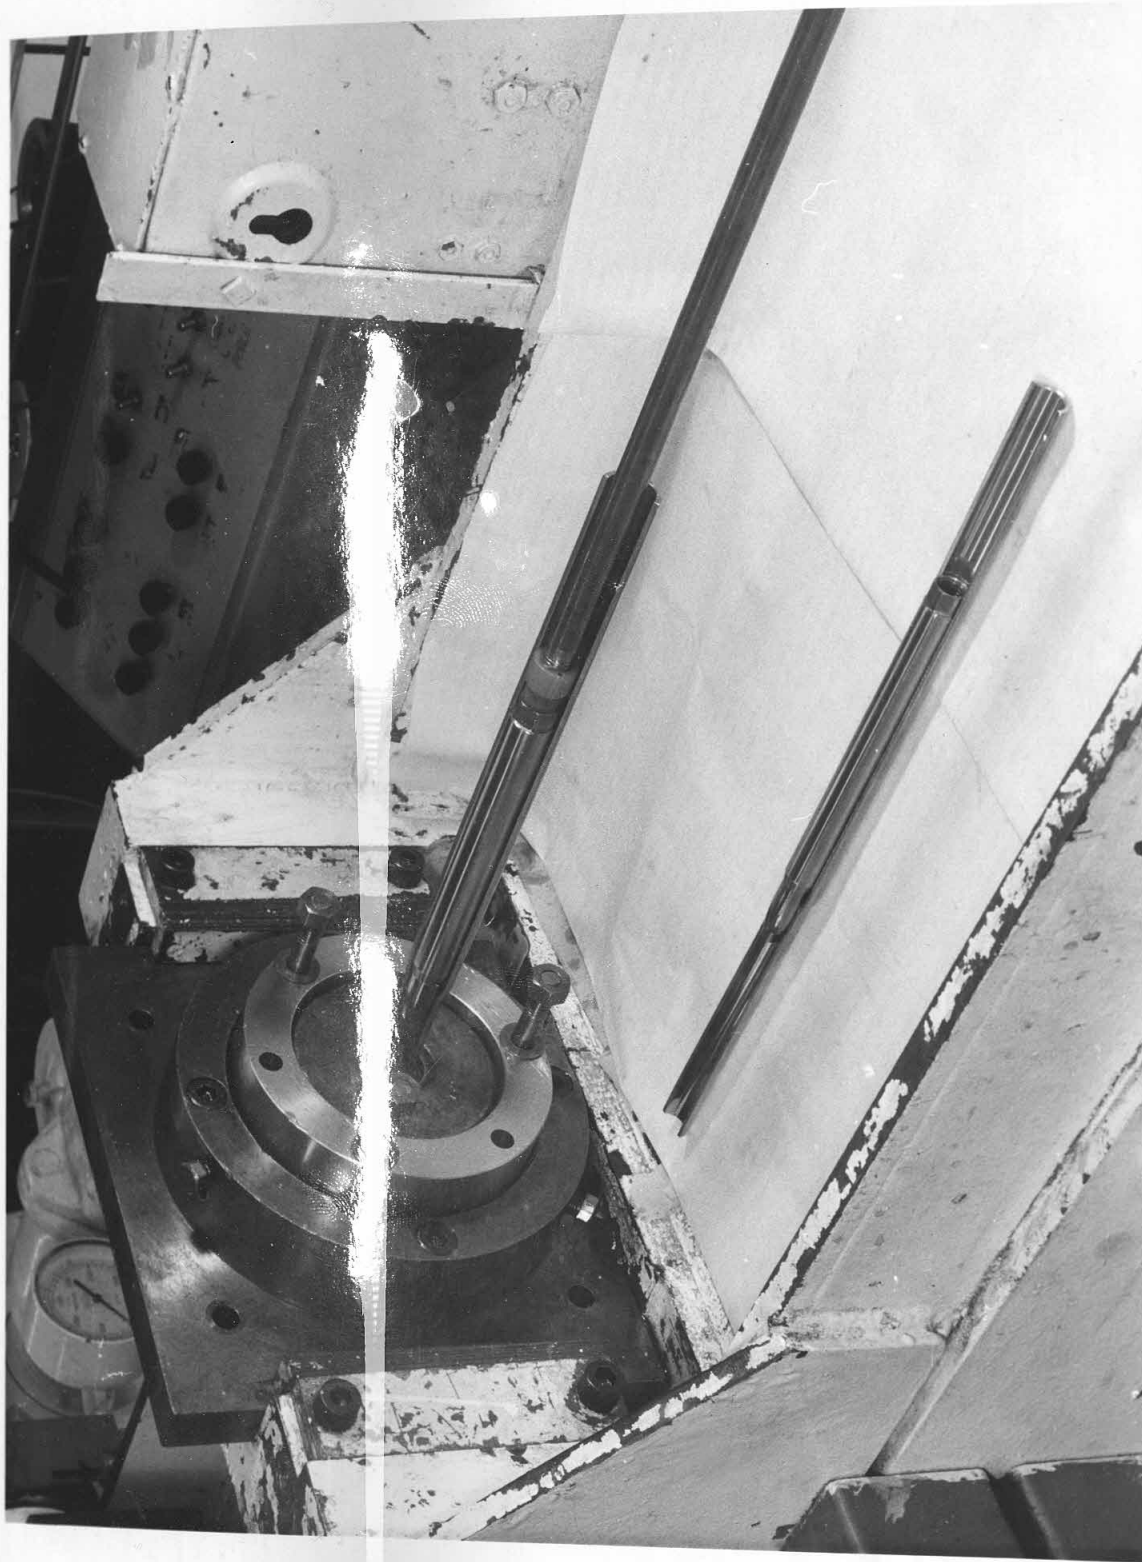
Arrangement of the plug-attachment technique during drawing
